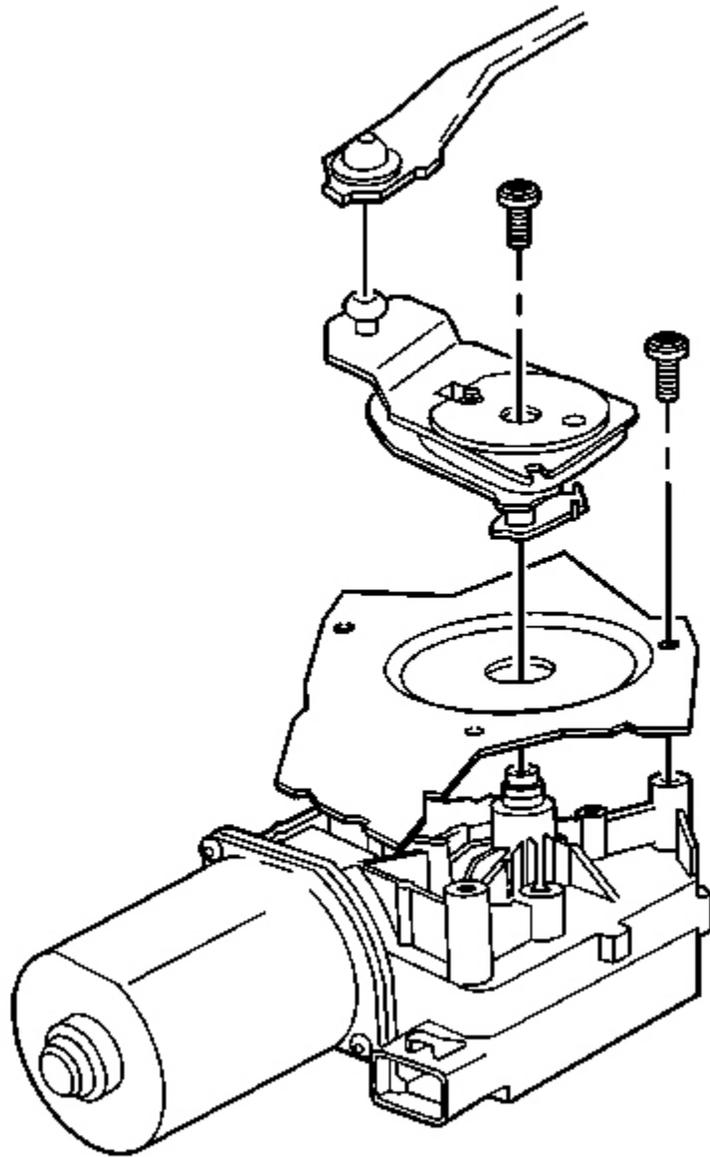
Wiper Motor Splash Shield To Wiper Motor
